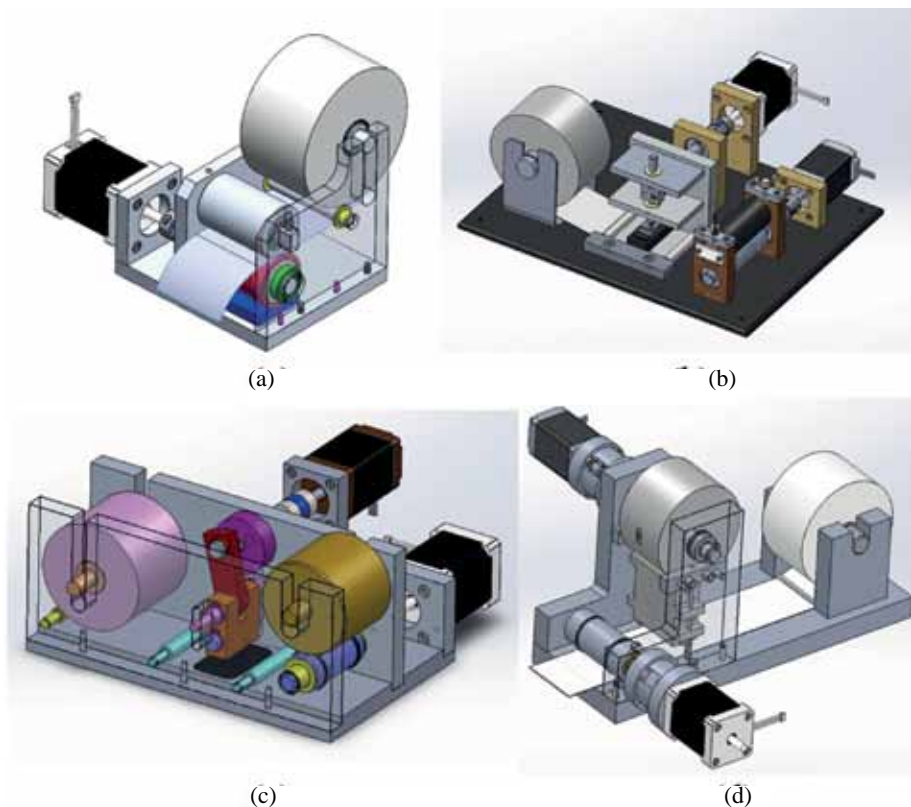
CAD Models of Print Stamping Machine Designs by (a) Group 1, (b) Group 2, (c) Group 3, and (d) Group 4
